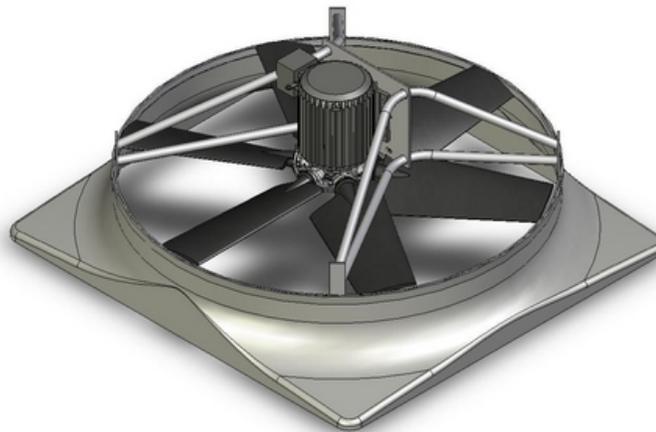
Motor, Motor Support, Fan, Fan Shroud
